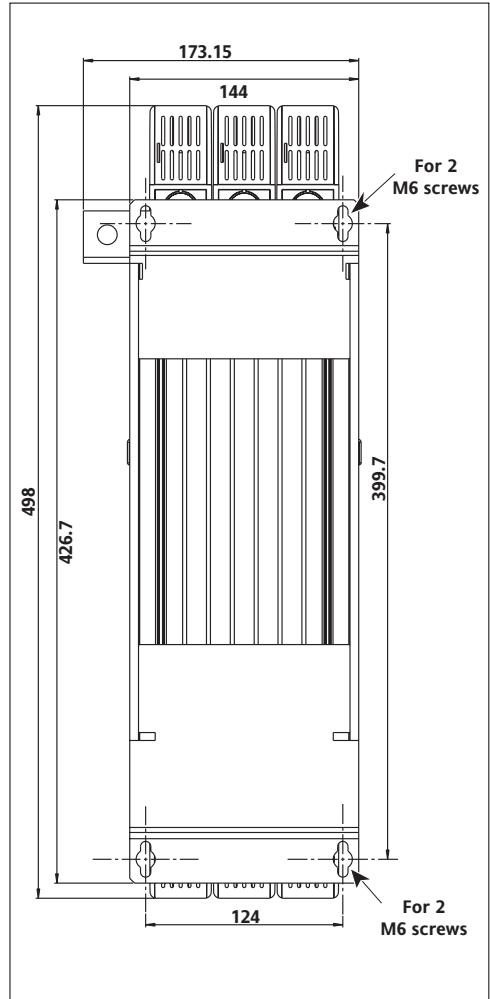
Bulkhead mounting -  $\geq 125A$  units
